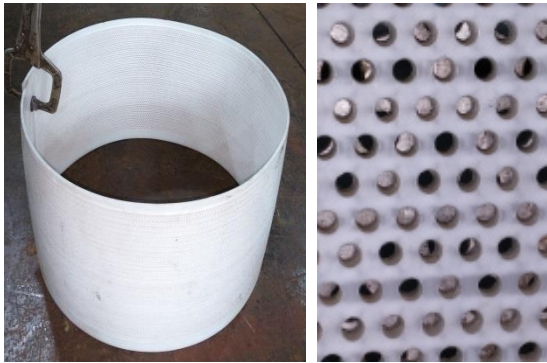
Inner spacer with protection film and several holes to minimize scratch on surface
